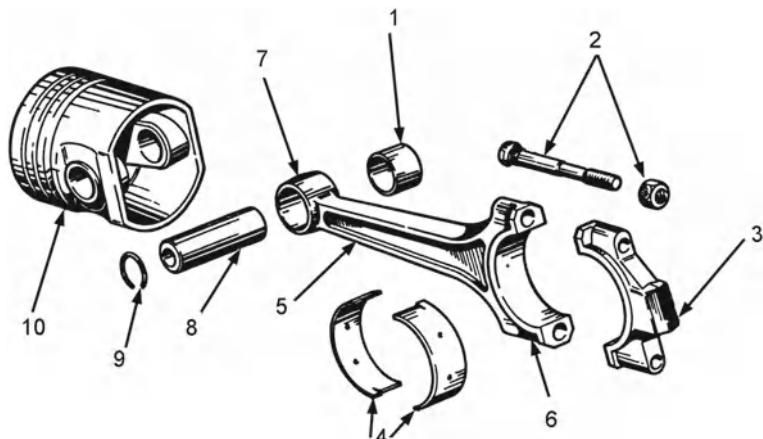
Connecting rod and piston assembly (courtesy of FIAT)
